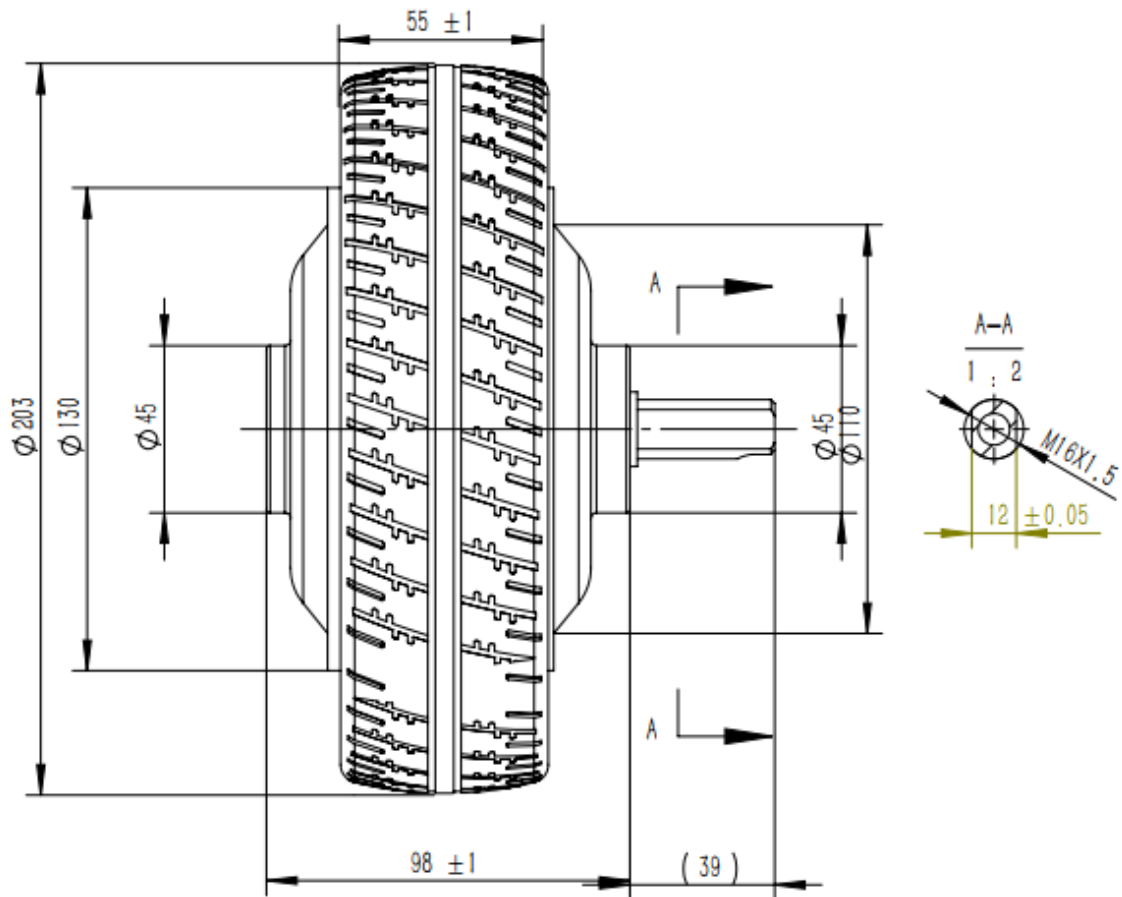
8-inch 13Nm/15Nm inflatable tires (without brakes) hub motor installation size
